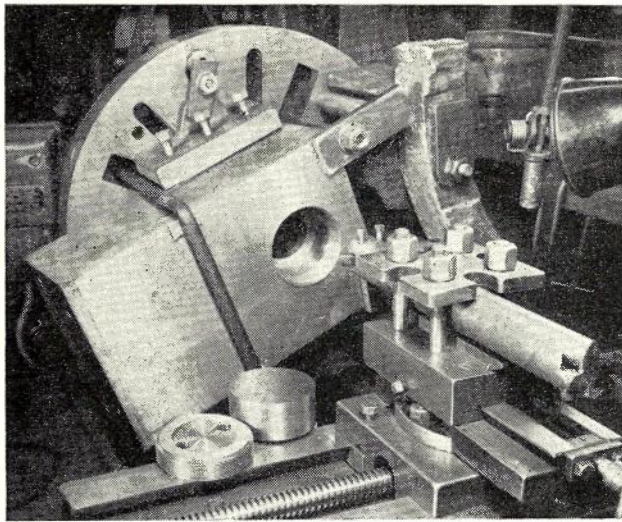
Dial Housing Component. Bottom force—boring "false bottom seating.
